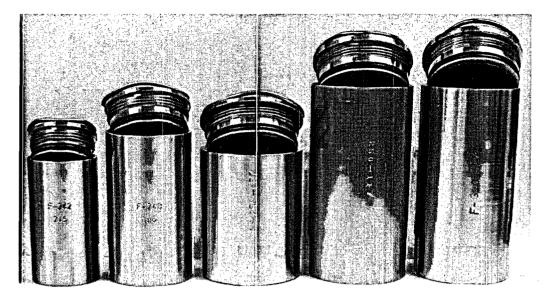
F-458 Leakproof Inserts (L to R): F-242, F-248, F-256, F-250, F-320
